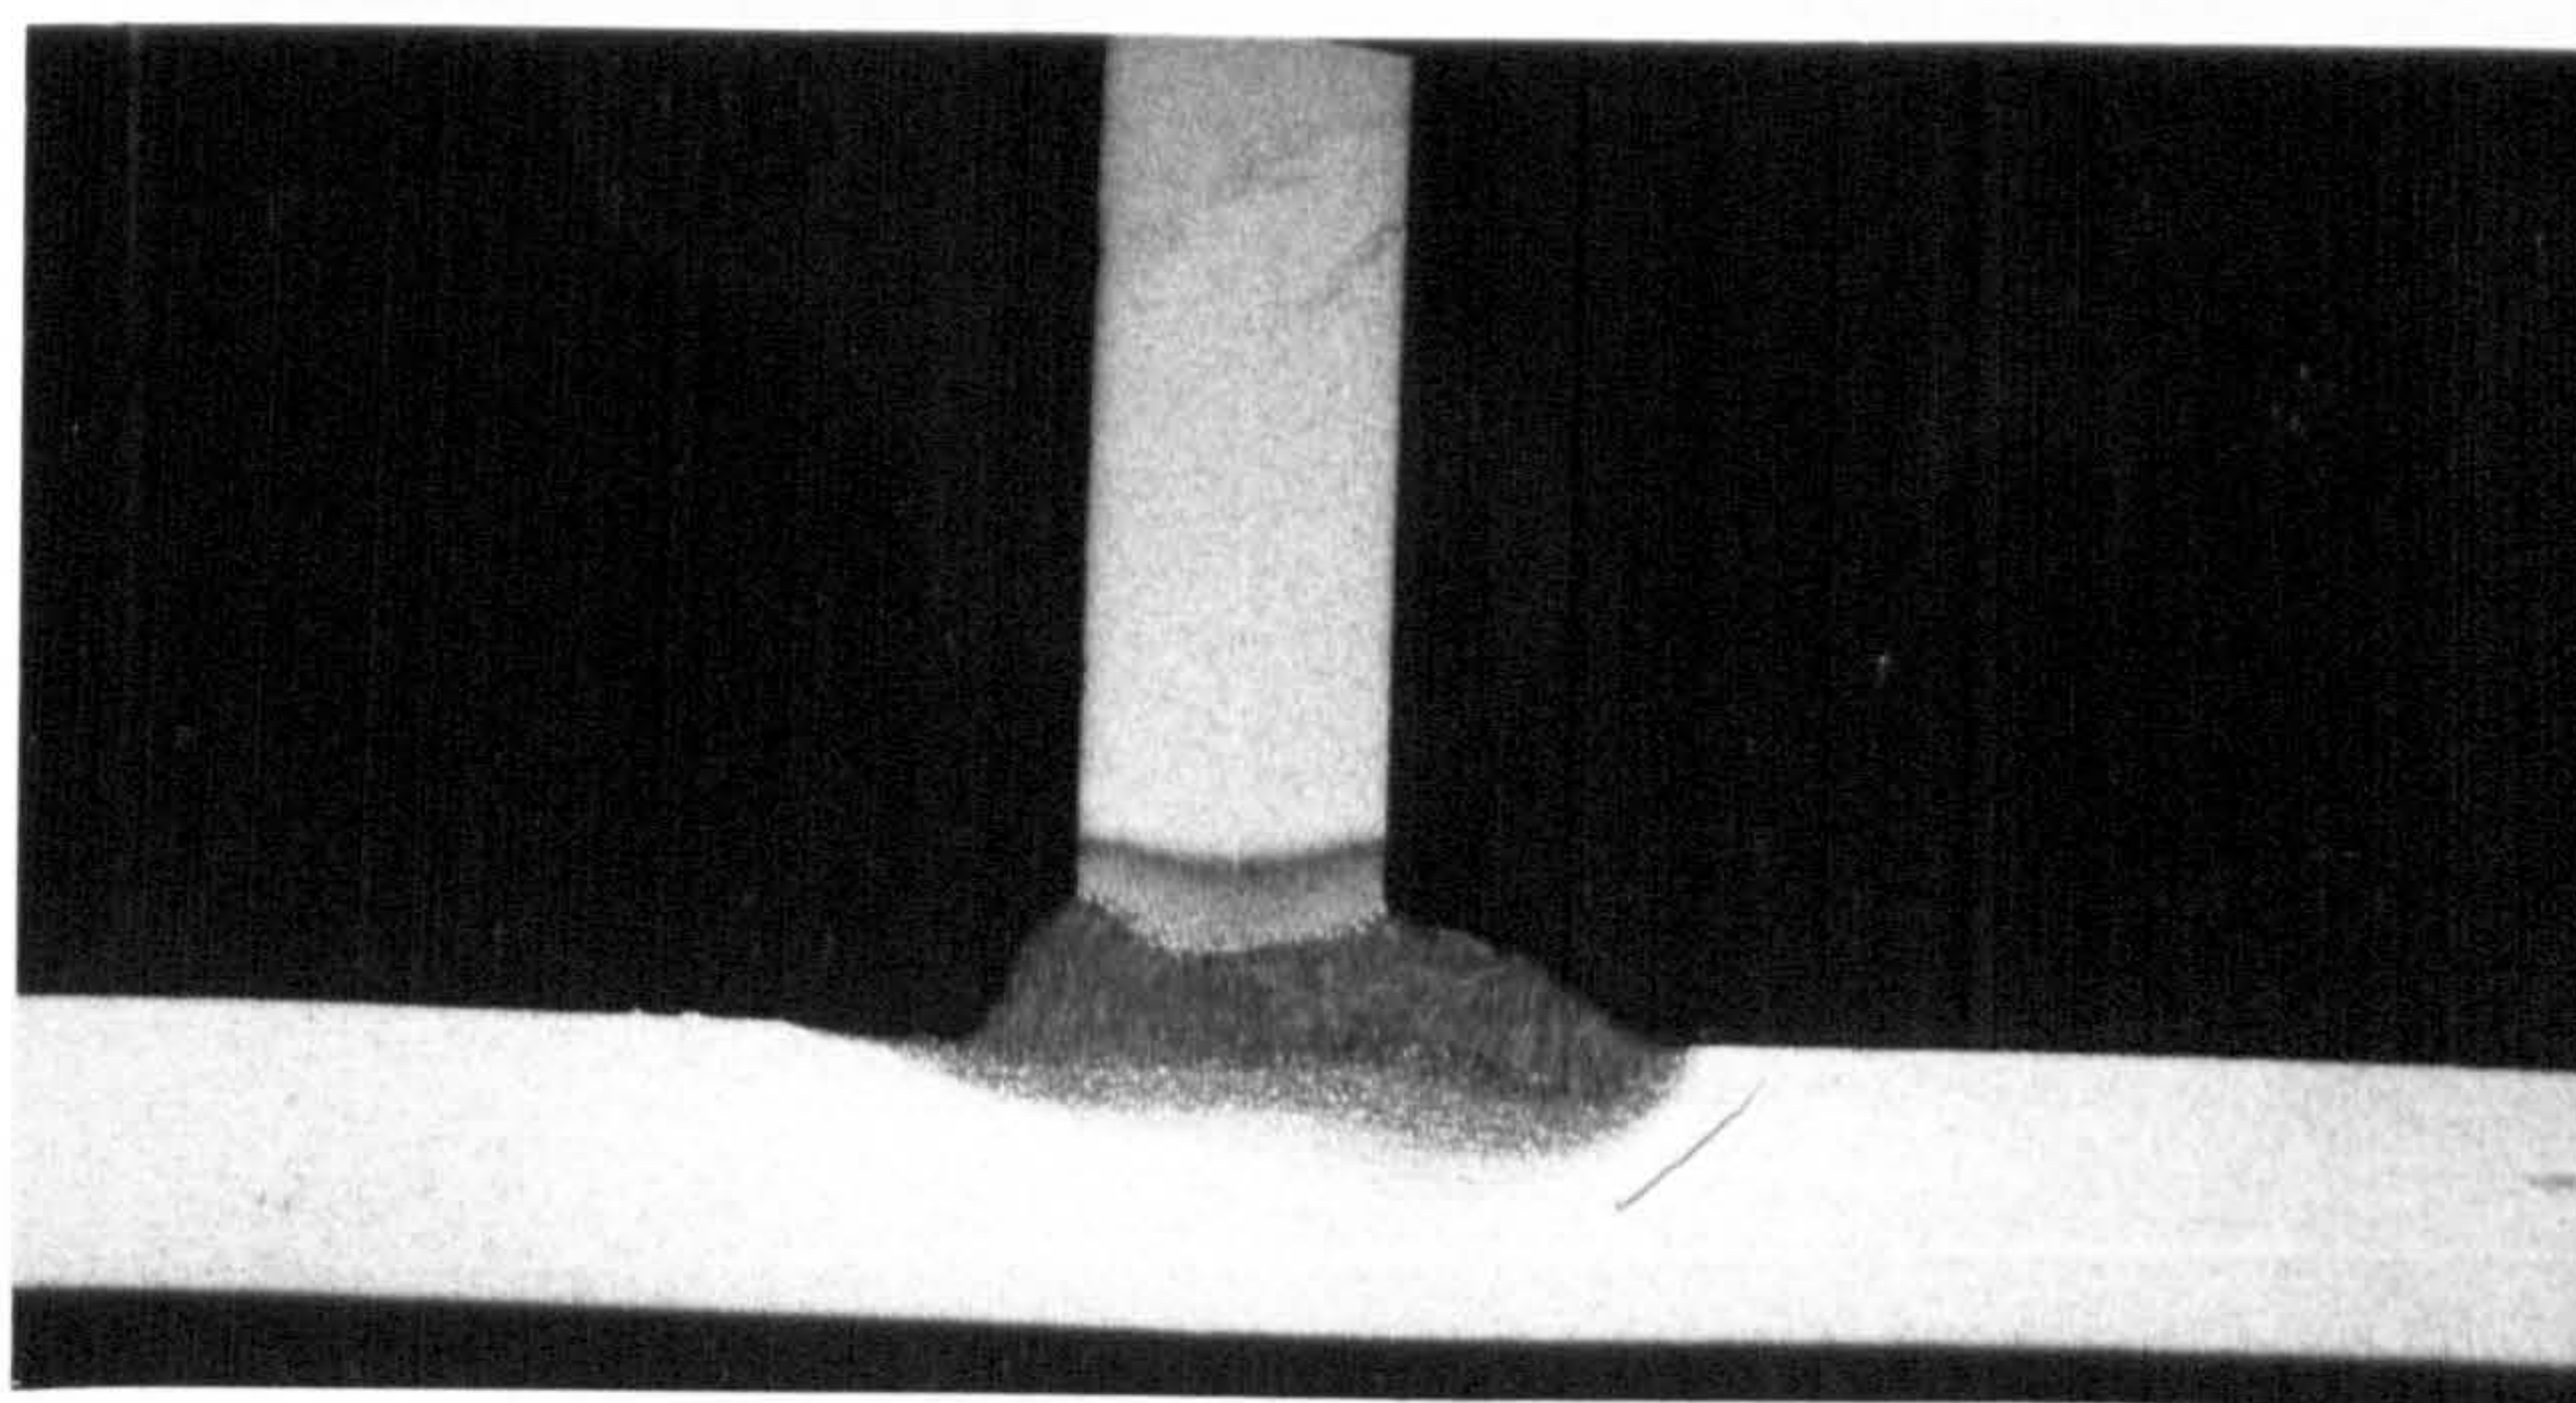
Macrophoto (x4.8) of a skid weld in 3mm thick plate (power = 5kW)
